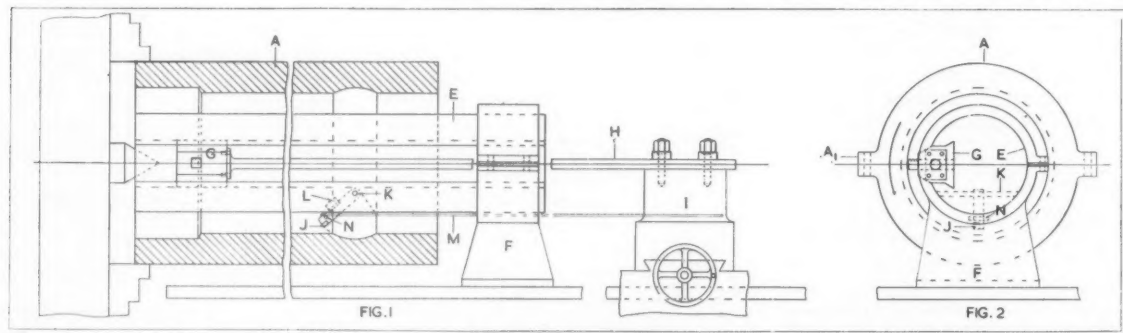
Container sleeve in half section showing taper boring bar E and spherical toolholder and cutting tool J in action. Fig. 2. End elevation showing taper toolholder G with pull rod H attached. Also split bearing bracket F holding boring bar E stationary
